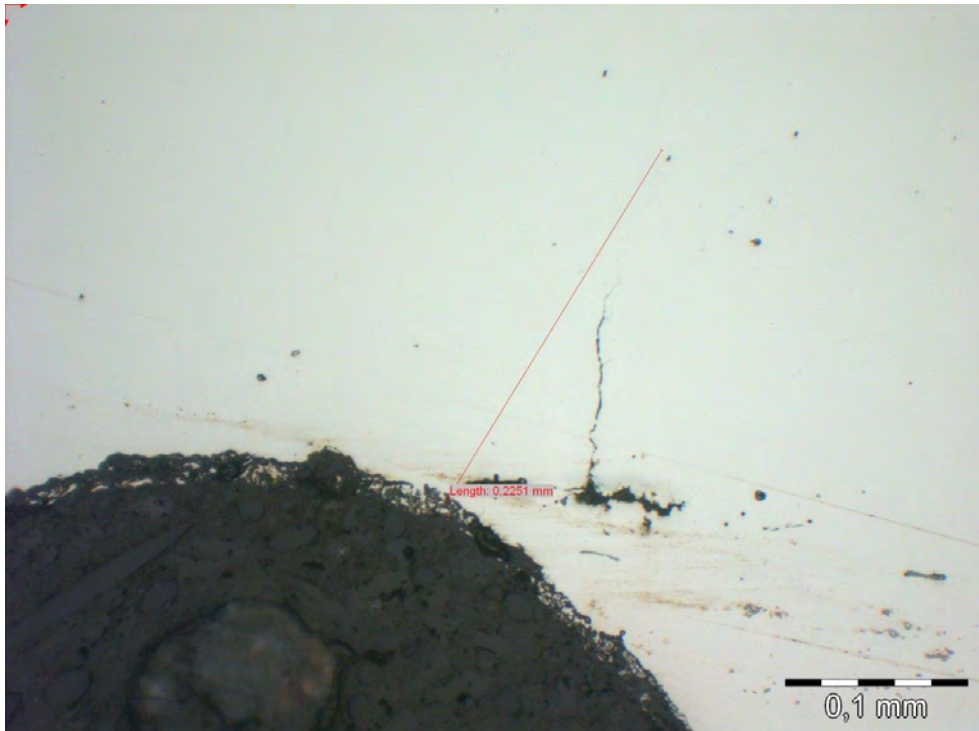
Crack at segment B, fourth ridge on barrel no. 8832/6713
